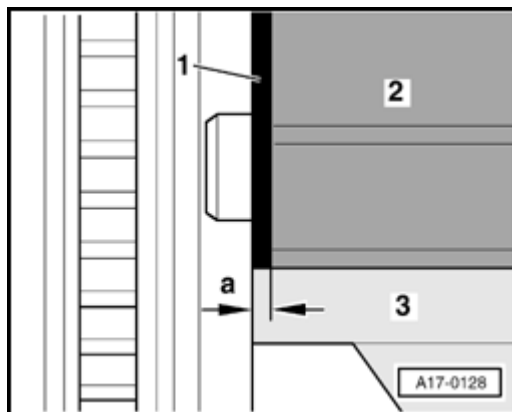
Ensuring That Oil Pan Is Positioned Flush With Intermediate Plate At Flywheel End
